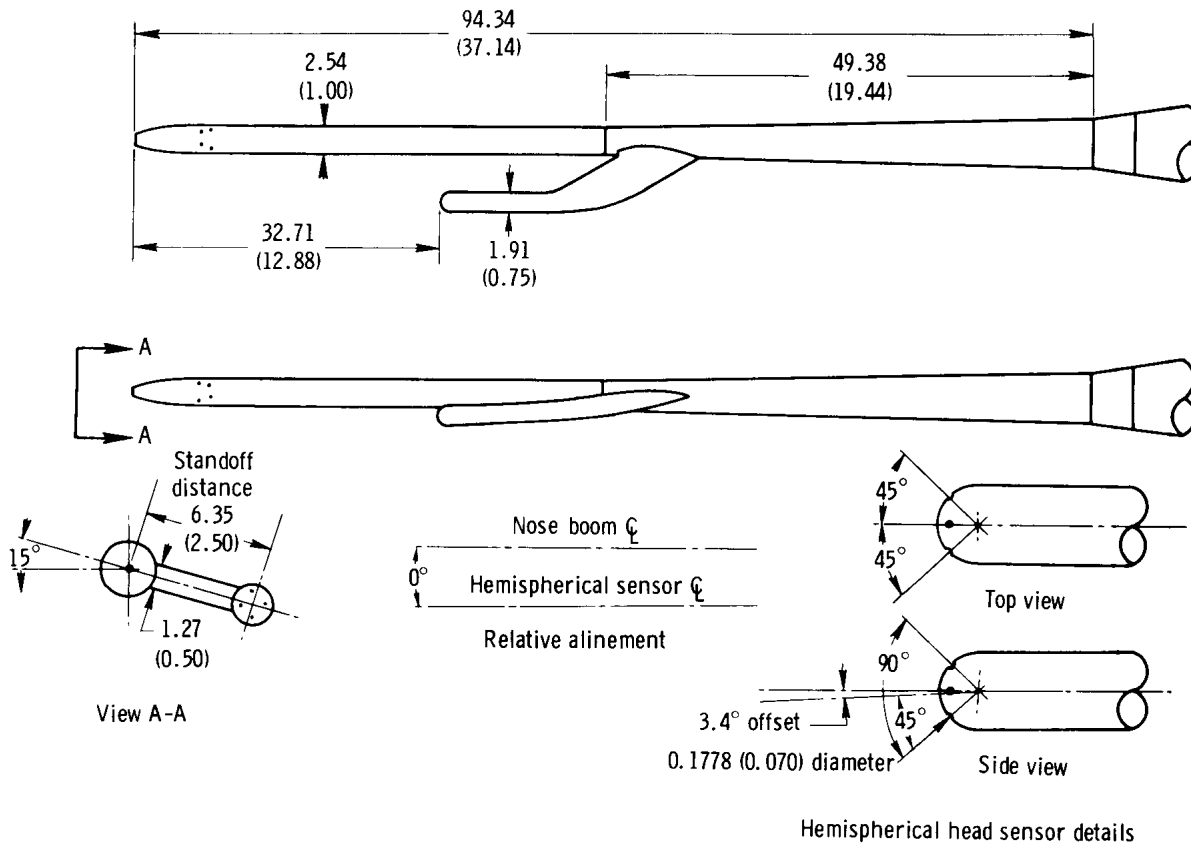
Three-view drawing of nose boom and pitot-static probe showing hemispherical head flow direction sensor. Dimensions in centimeters (inches).
